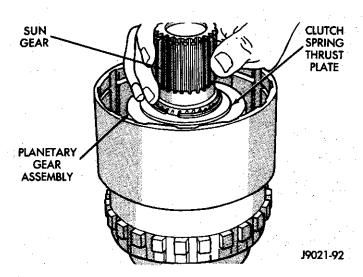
Installing Sun Gear And Clutch Spring Thrust Plate
